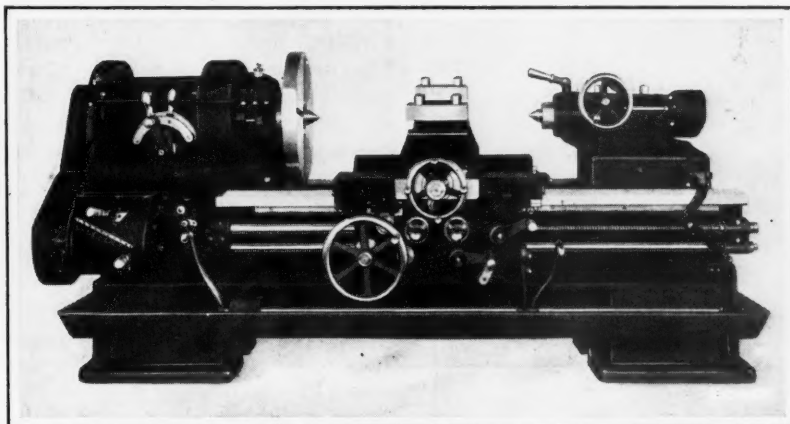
Lathe built in 26- and 30-inch Sizes for Heavy Work
